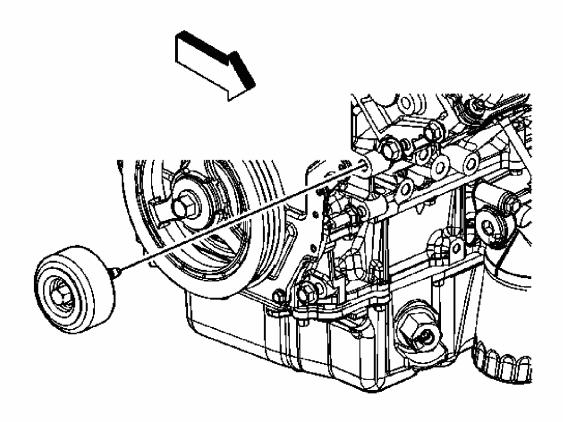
Identifying Drive Belt Idler Pulley Courtesy of GENERAL MOTORS CORP.
